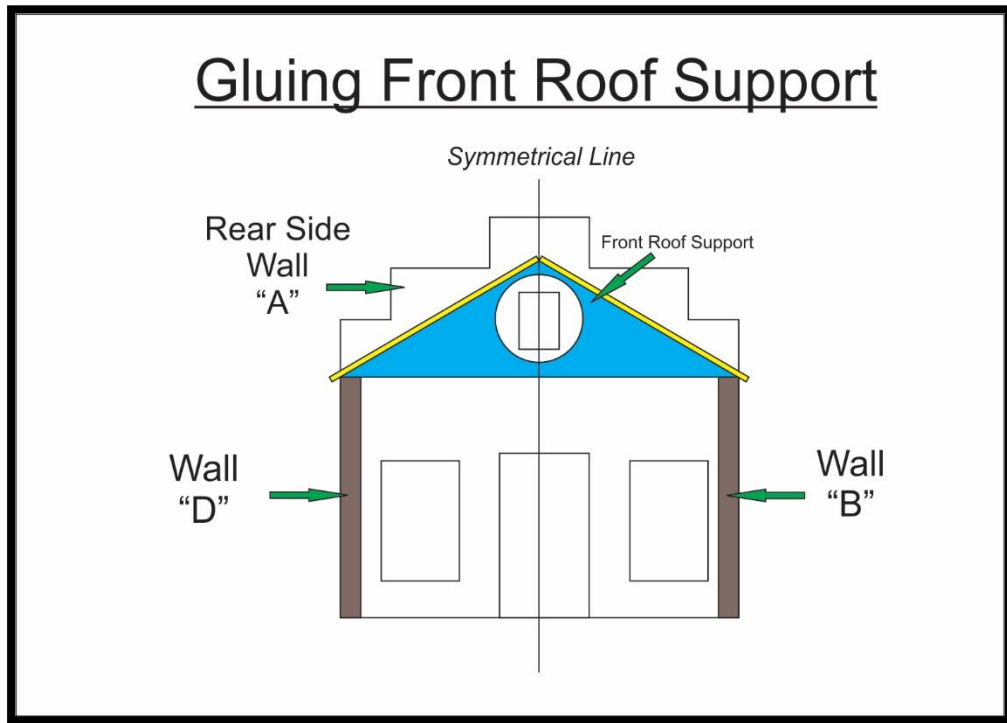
FRONT SUPPORT ASSEMBLY
